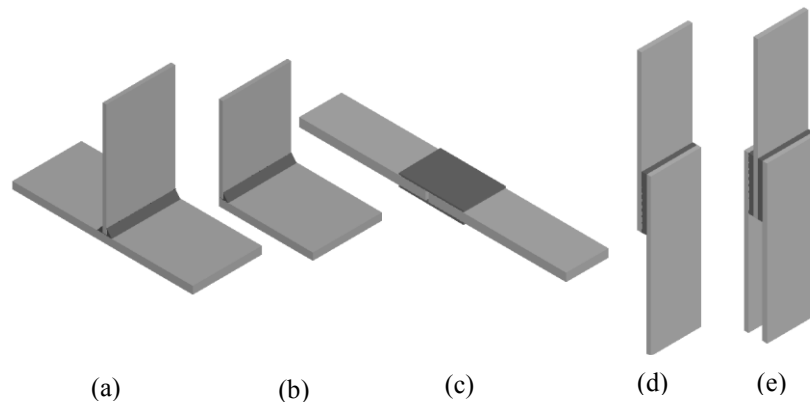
Different types of adhesively bonded joints, (a) T-joint, (b) L-joint, (c) double strap joint, (d) single-lap joint, (e) double lap joint.
